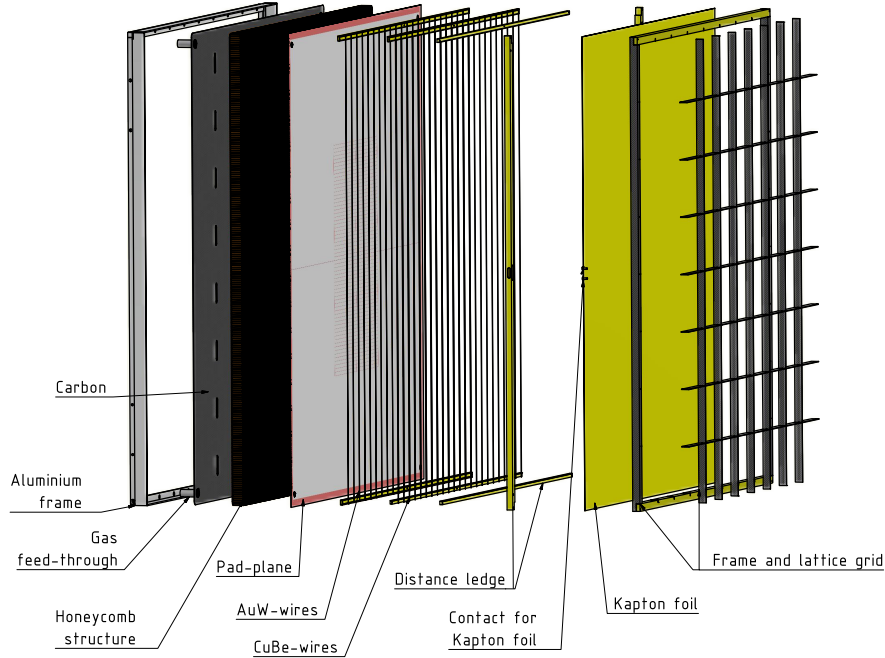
Explosion view of the used MWPCs: [CBM18]
